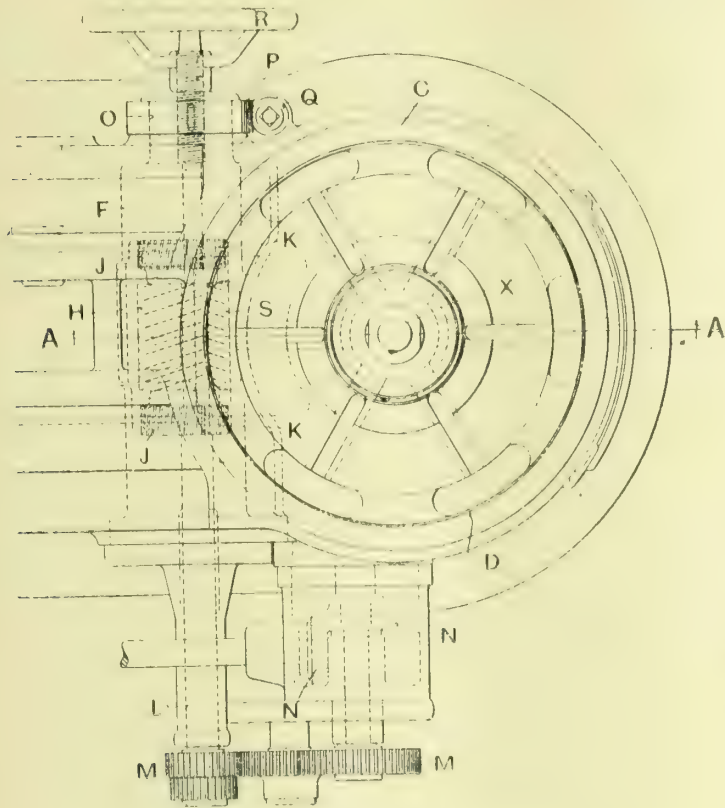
BROWN'S WORM WHEEL GENERATING MACHINE.
